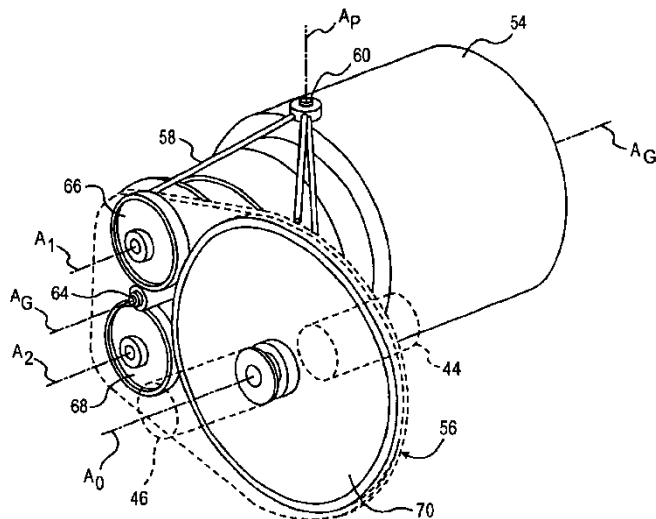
Perspective view of the split torque gearbox with pivoted engine support (Gmirya, 2005)
